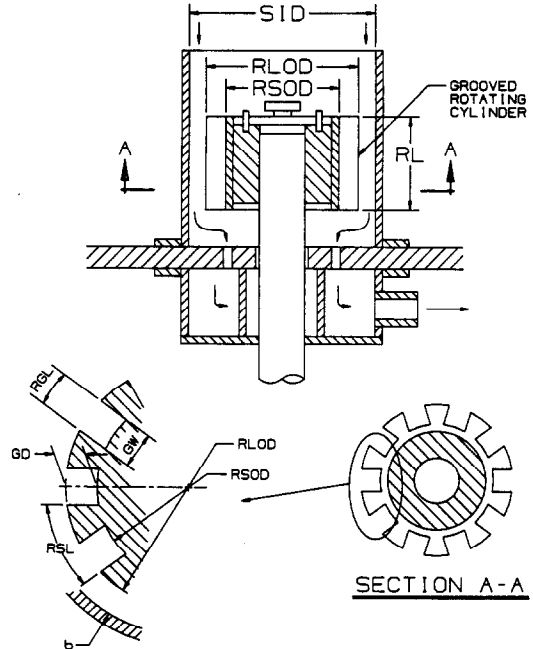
Construction of Configuration (B). Mass transfer surface: inner grooved rotating.
